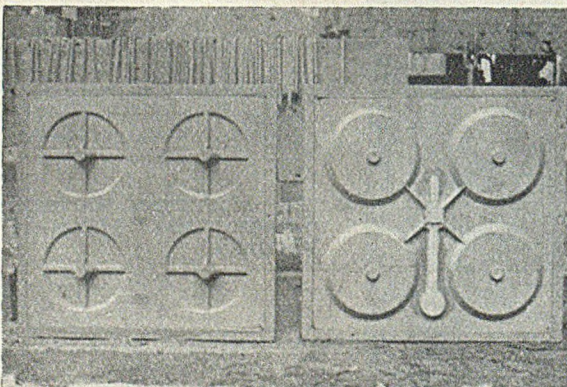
VALVE PATTERNS MOUNTED ON MACHINE PLATES.
